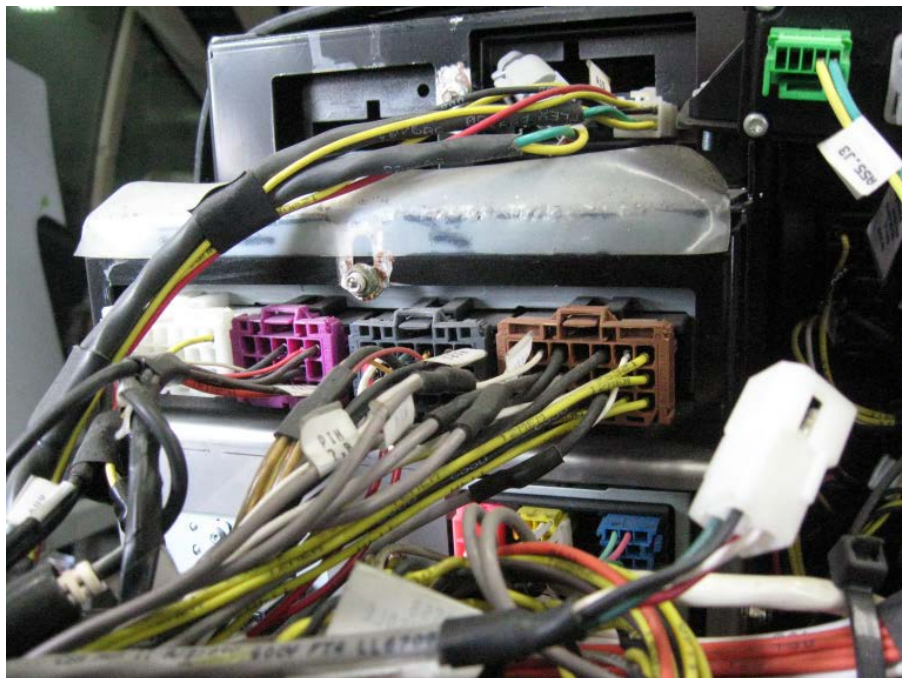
Installed VSS05 showing enlarged support opening and bigger harness connectors.
